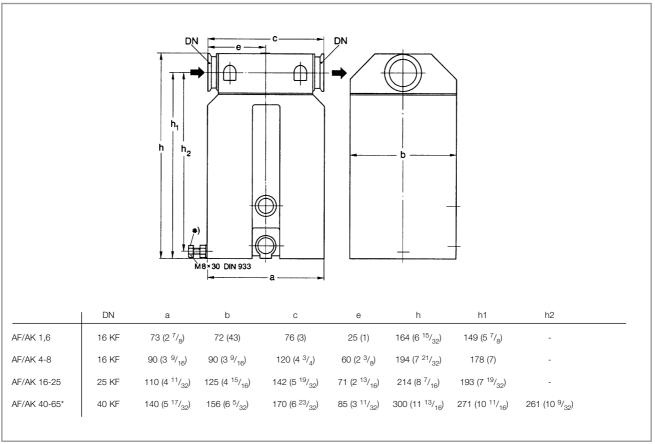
Dimensional drawings of the exhaust filters, separator similar, dimensions in mm (inch)
